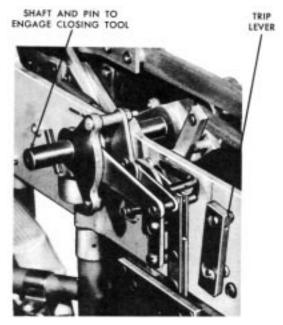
Move trip lever to the right to release recloser when opening with closing tool.
